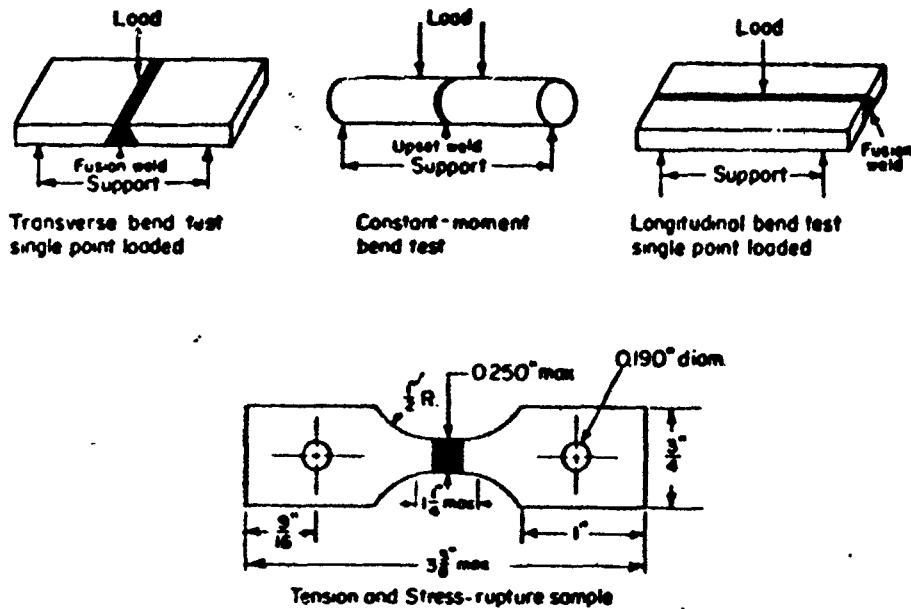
TEST SPECIMENS FOR FUSION OR UPSET WELDS IN MOLYBDENUM
